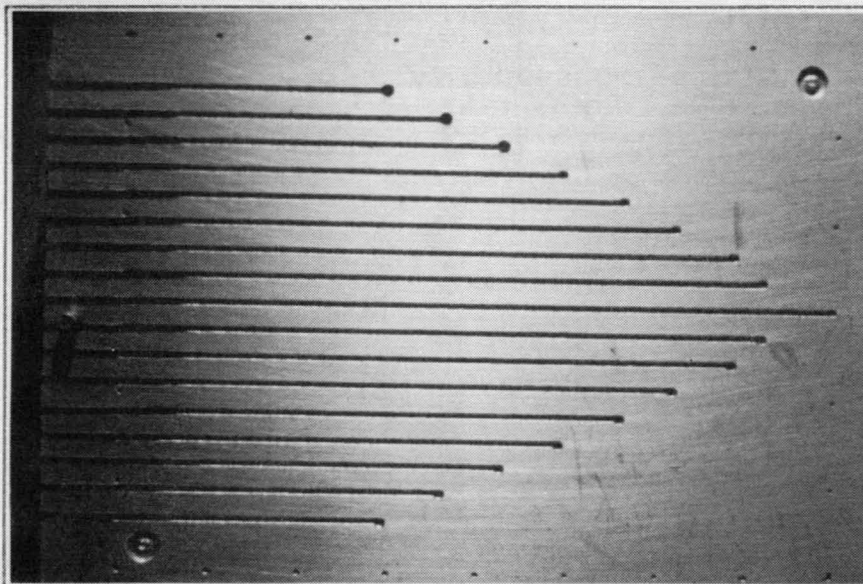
Layout of chemically milled channels and drilled holes in stainless sample RH2
